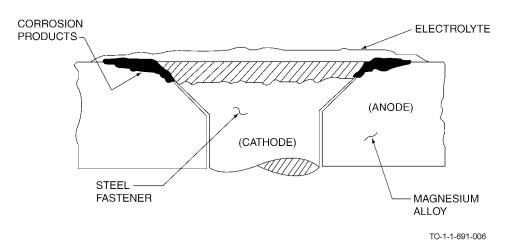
Galvanic Corrosion of Magnesium Adjacent to a Steel Fastener
